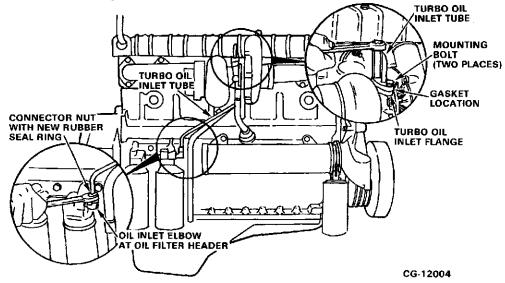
Turbocharger Oil Inlet Tube Installation
